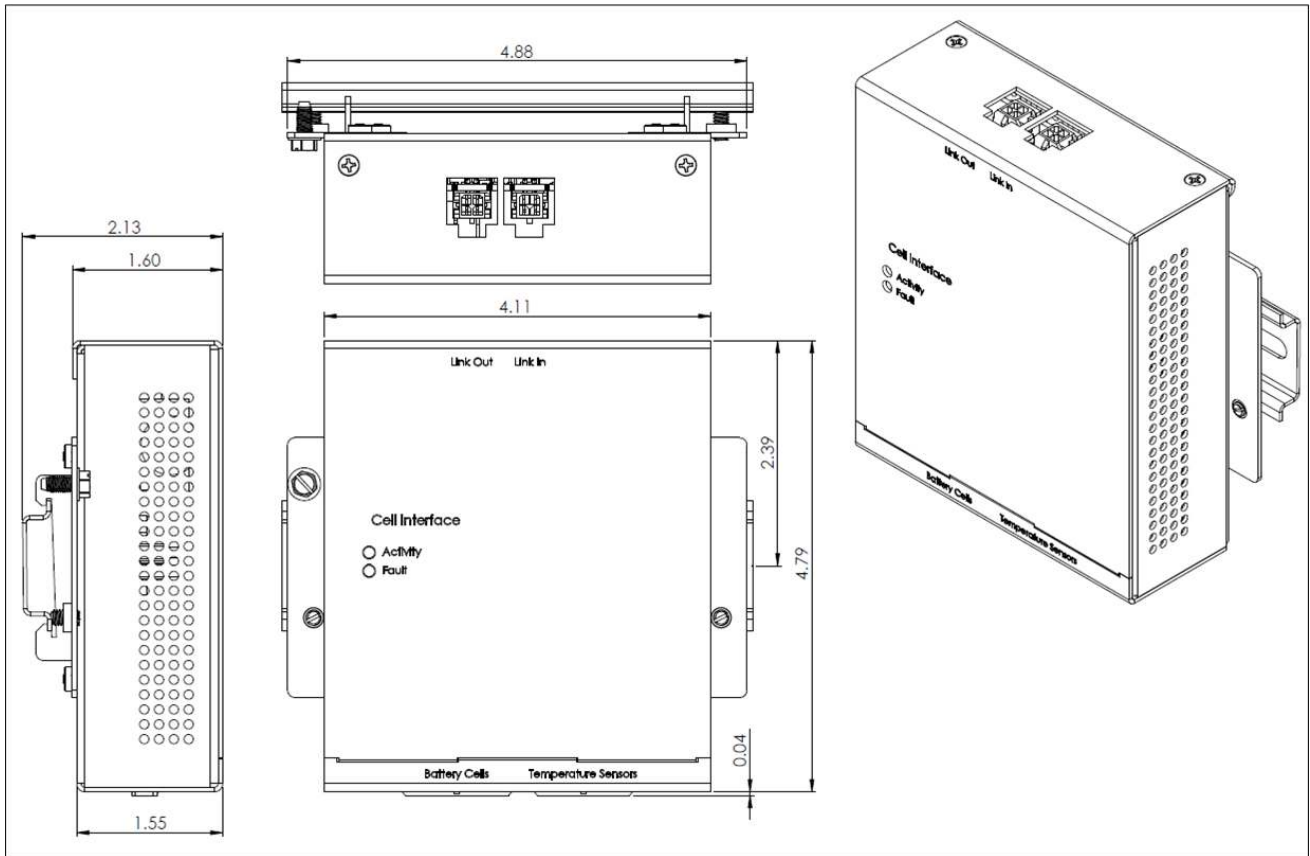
Mechanical Drawing of Cell Interface with DIN Enclosure (NRND)
